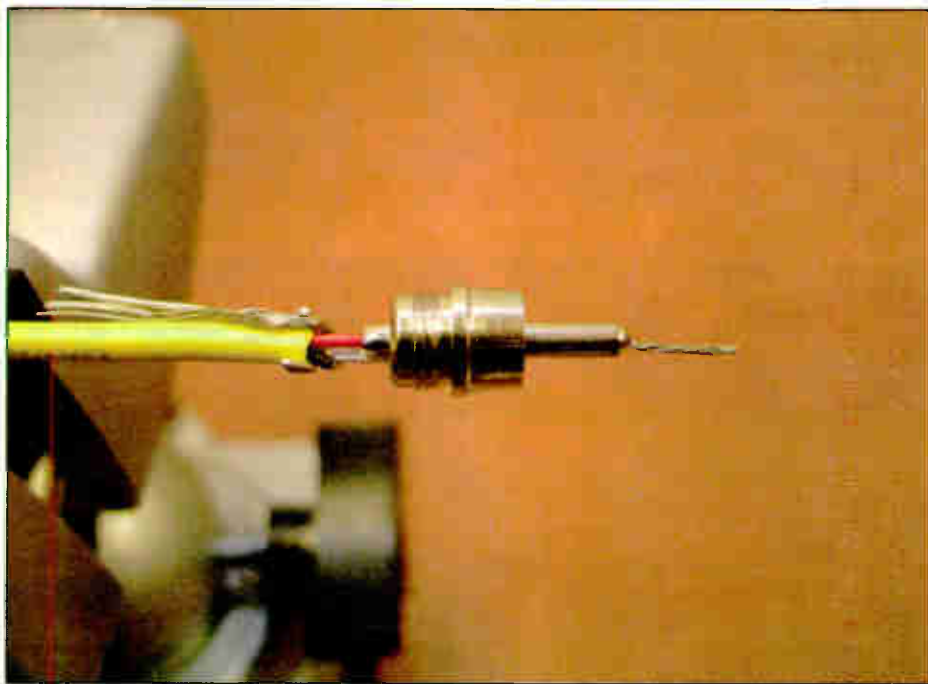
With patience, you too can enjoy neatly soldered RCA plugs.
